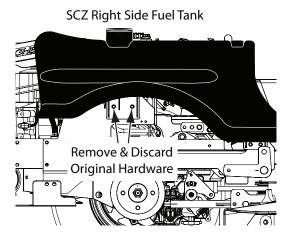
SCZ-61V OCDC Bracket Mounting
